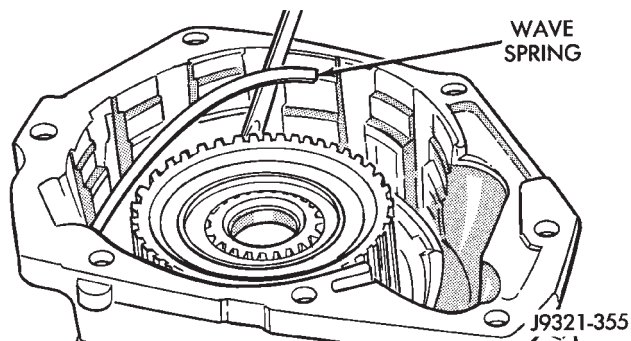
Overdrive Clutch Wave Spring Removal/Installation
